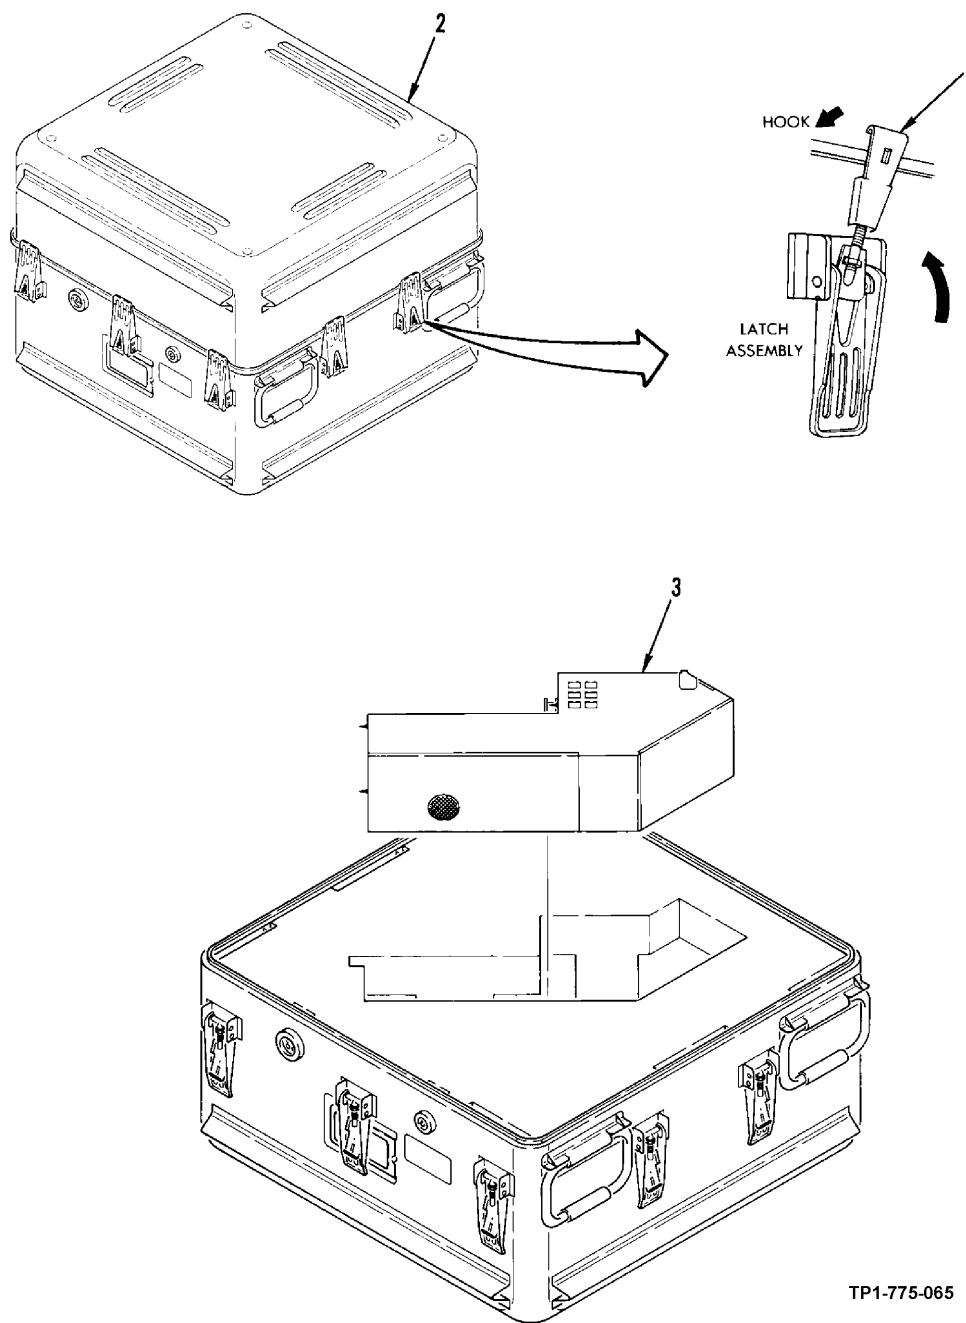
IVD Electronics Assembly Installation into Shipping and Storage Container
